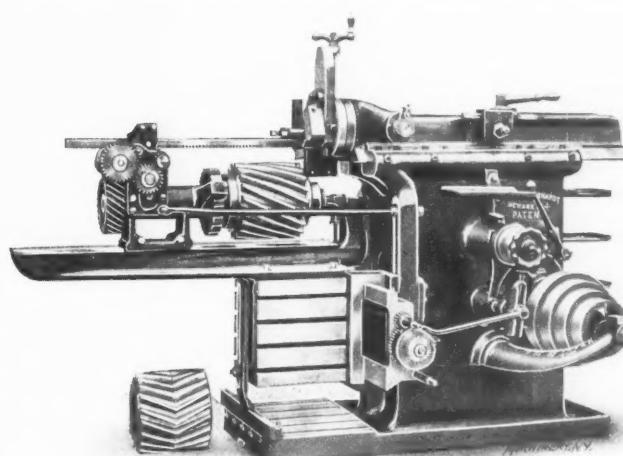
Helical Planing Attachment for Gould & Eberhardt Shaper, in which the Lead of the Helix is obtained by Change Gears.
